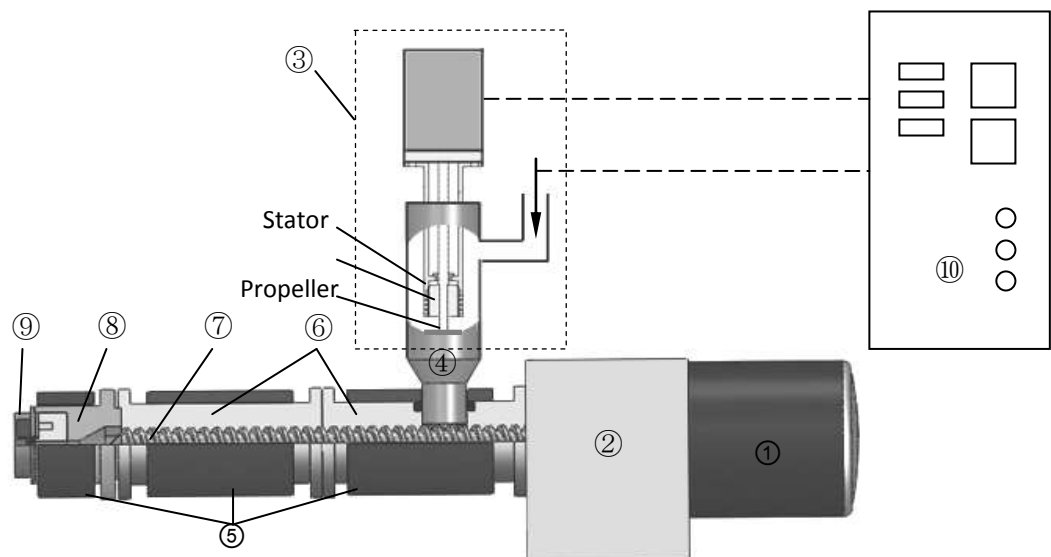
Schematic illustrations of the twin-screw rheoextrusion process including the main parts: 1- motor; 2- gear box; 3- rotor-stator high shear slurry maker; 4- funnel; 5- heaters; 6- barrel; 7- screws; 8- die system; 9- water spray cooler; 10- central control panel.
